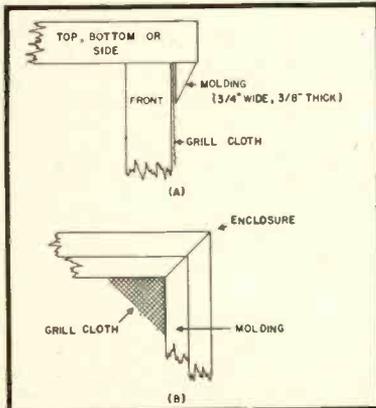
Side view (A) and front view (B) show how the grill cloth was attached to give a professional appearance.
